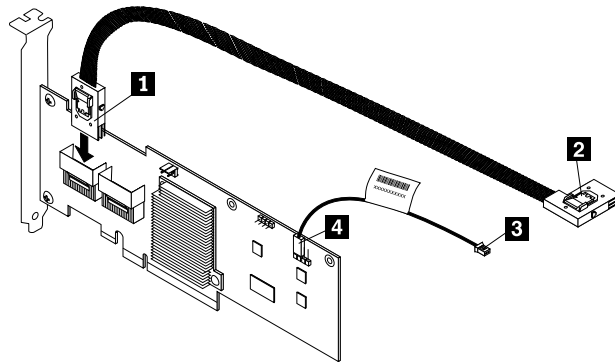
Connecting cables for server models with one 3.5-inch hot-swap hard disk drive backplane and a RAID card
